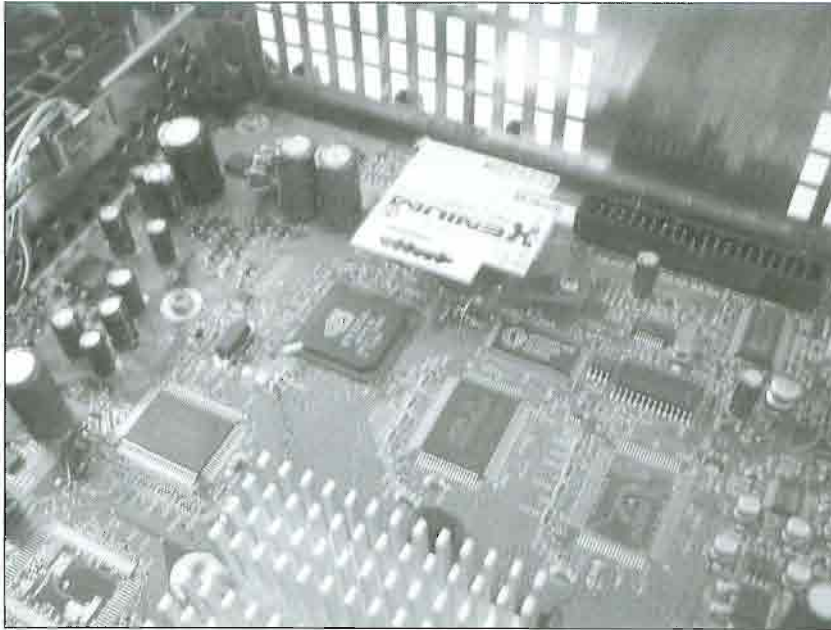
Bird's-eye view of the solderless adapter.
